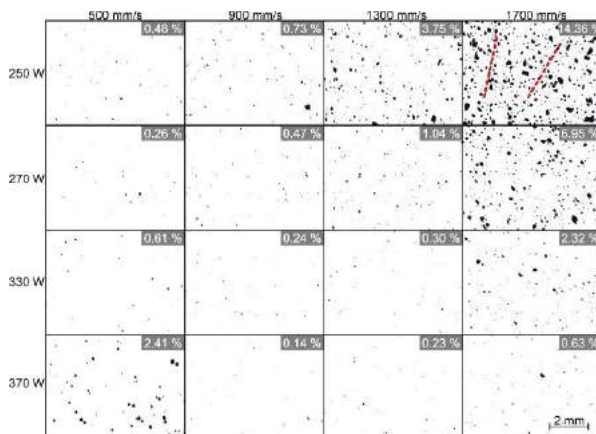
Surface porosity of top printed polished specimens with AM processing parameters.
